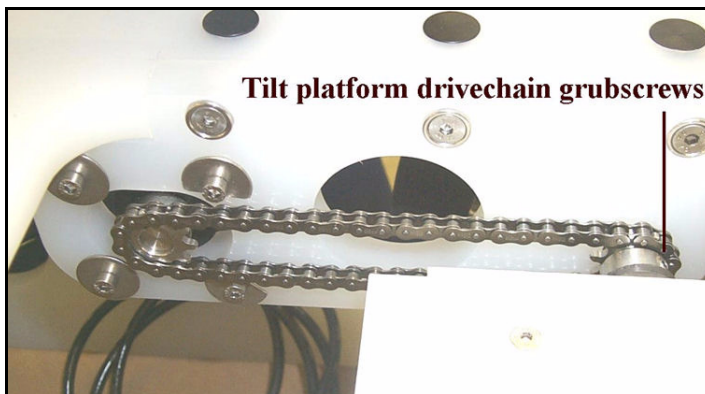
Tilt Platform Drive Chain Sprocket Grub Screws
